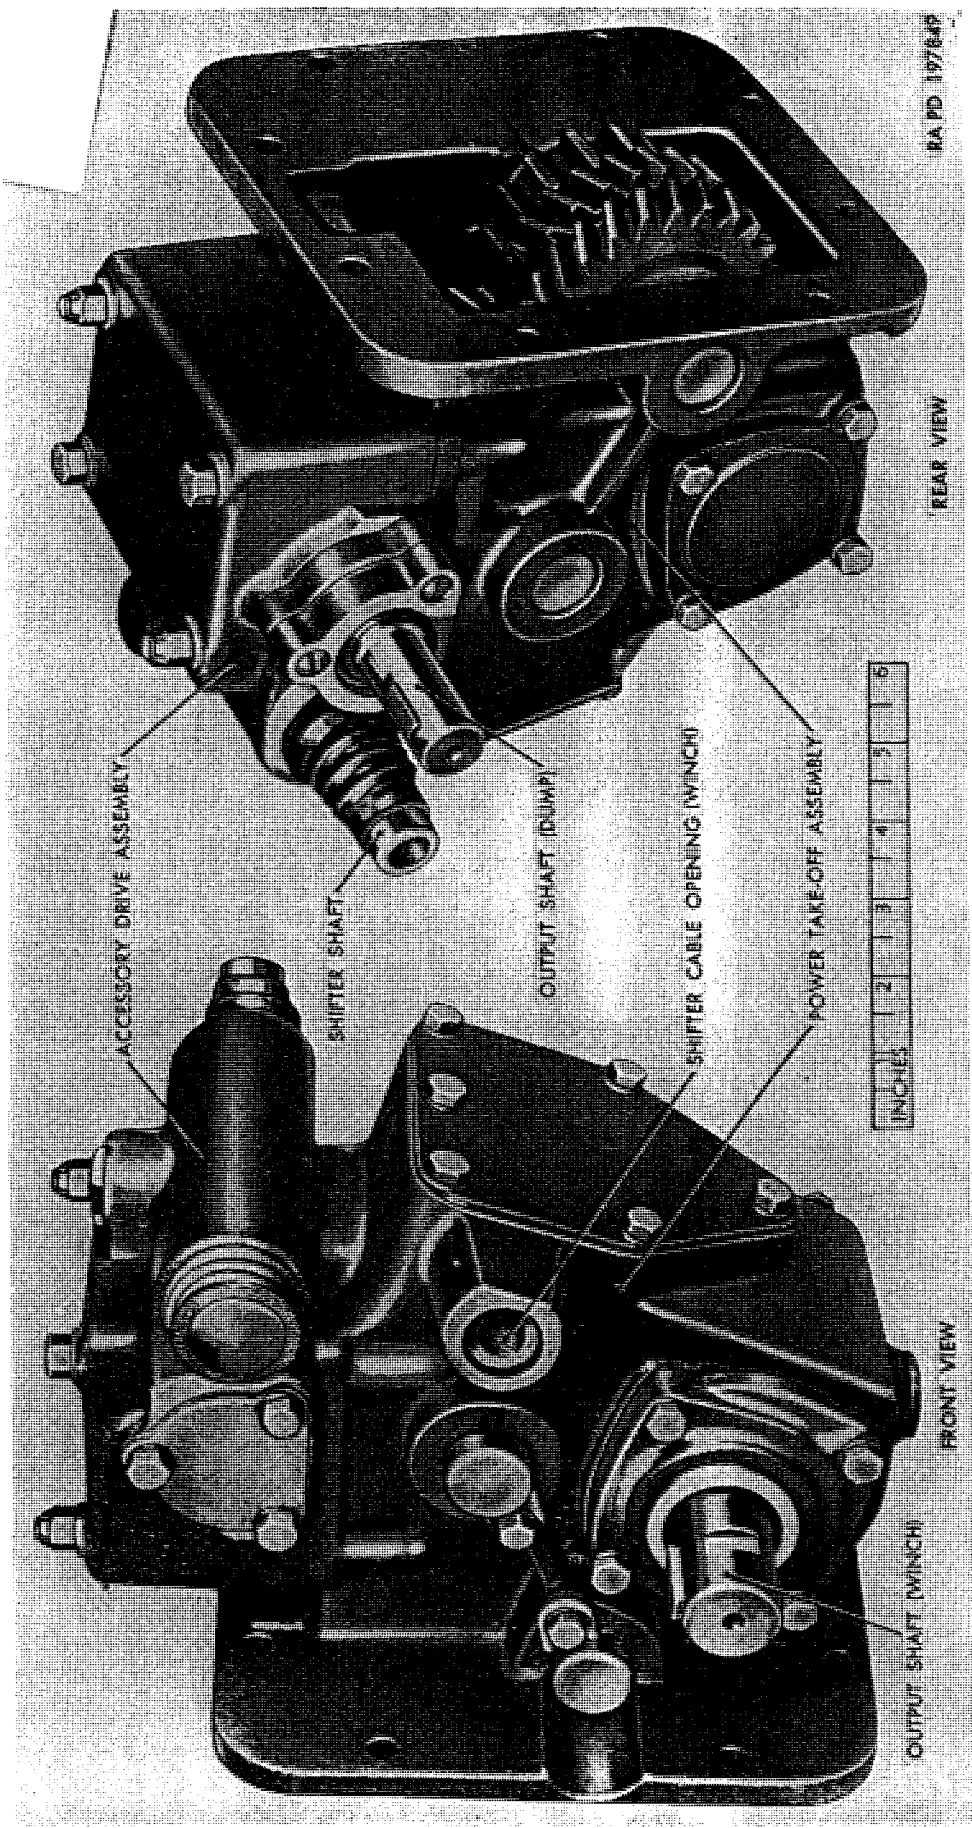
Front and rear views of dump body hoist and winch power-take-off and accessory drive assemblies.
